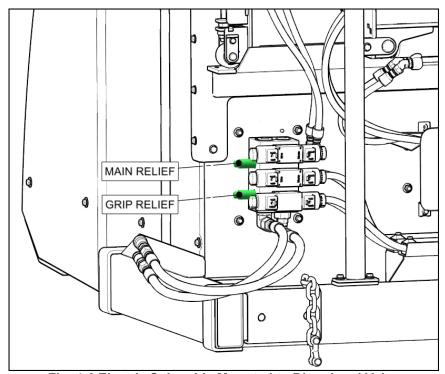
Electric Solenoids Mounted to Directional Valve
